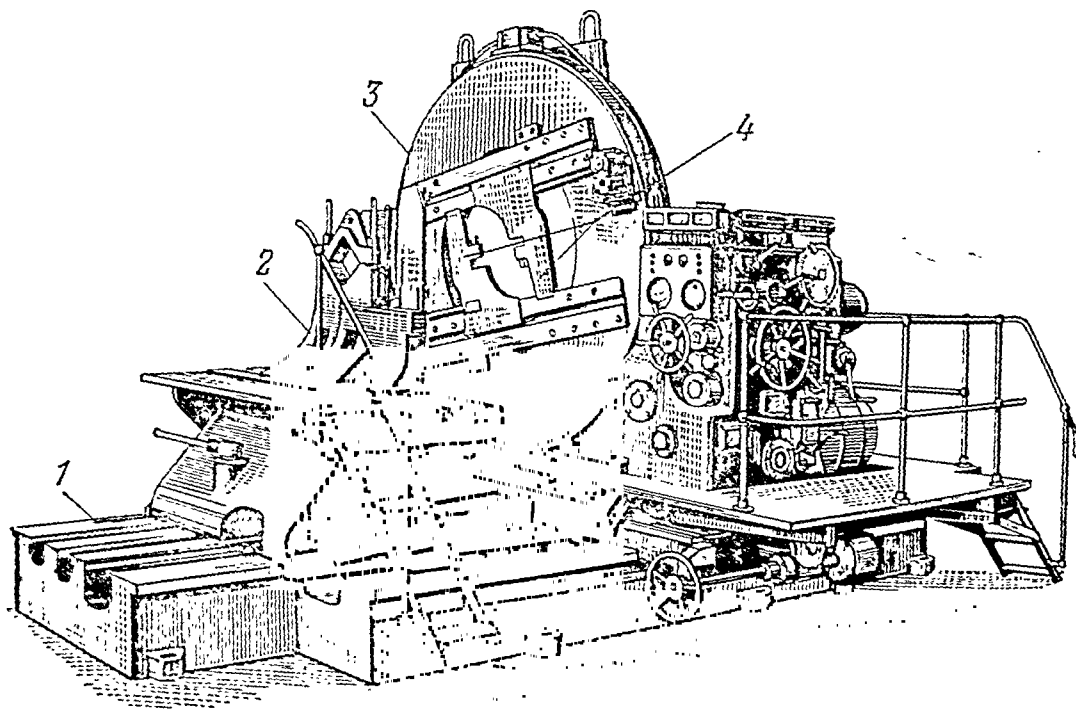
Lathe with rotating tools for turning the journals and crankpins of a crankshaft consecutively
